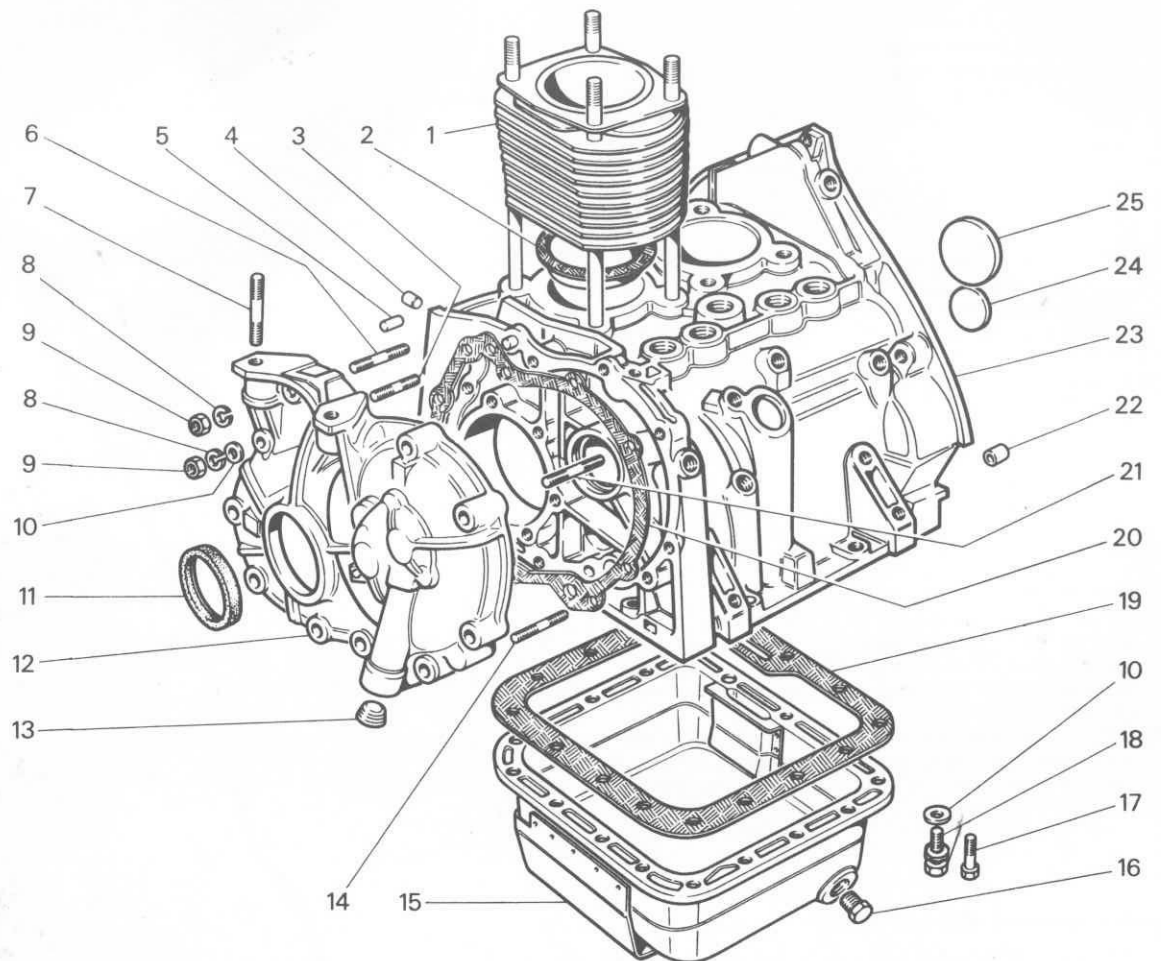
7 Cylinder, crankcase, timing cover and sump exploded to show location of gaskets
